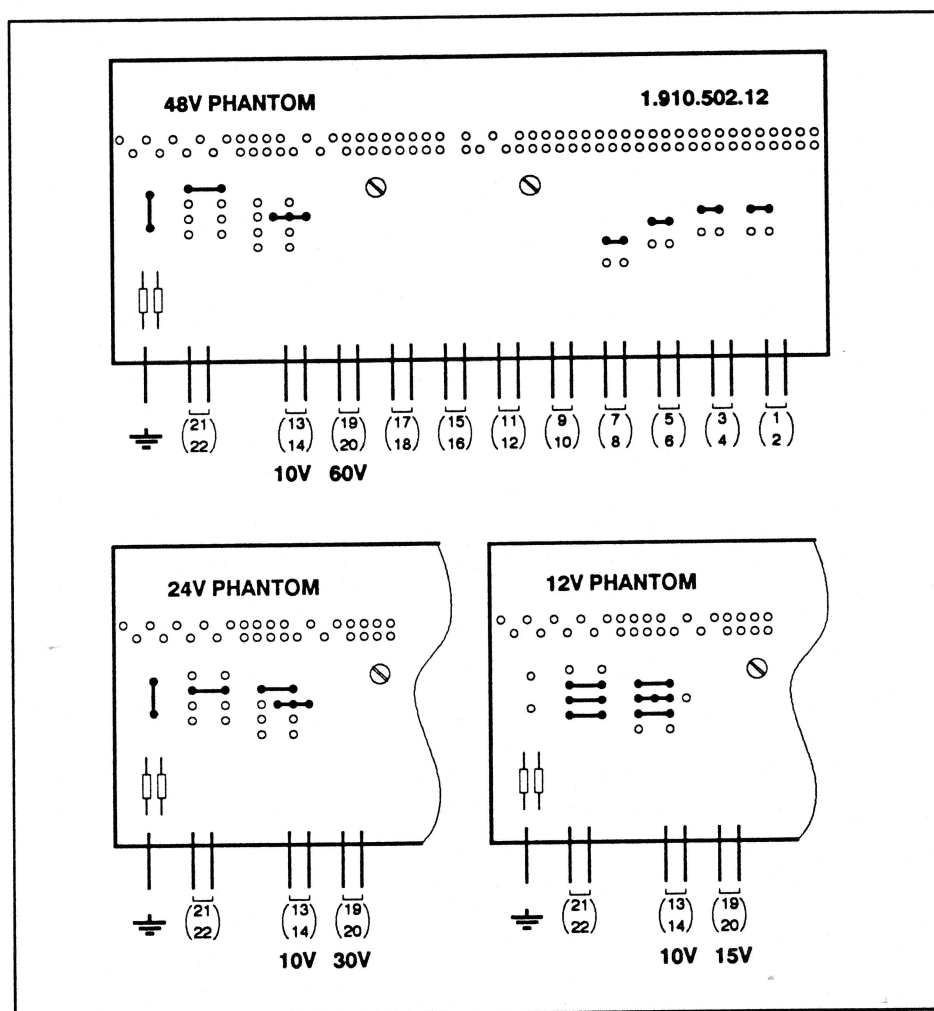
The phantom voltage can be set on the transformer board by soldering in straps.
